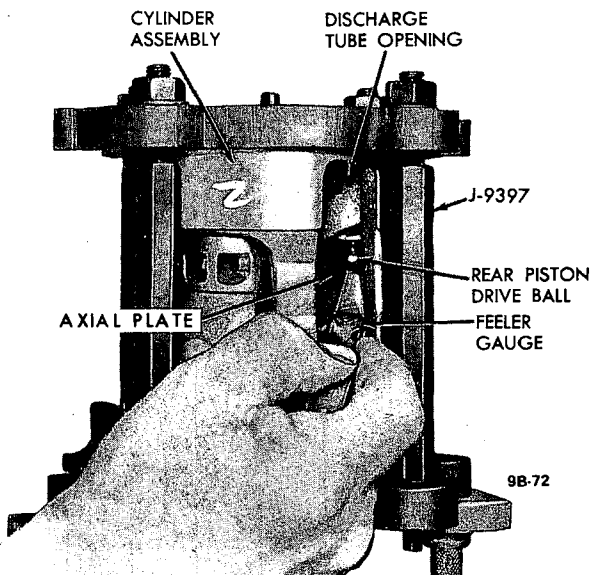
B-98 Checking Clearance Between Rear Piston Drive Ball and Axial Plate - 6 Cylinder Compressor
